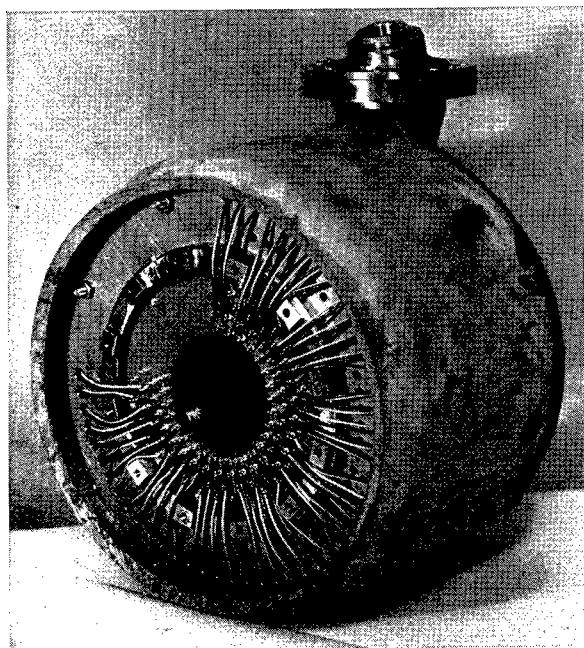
Assembly of rubber boot over elements, with one end flange in place, HP-8D transducer.
